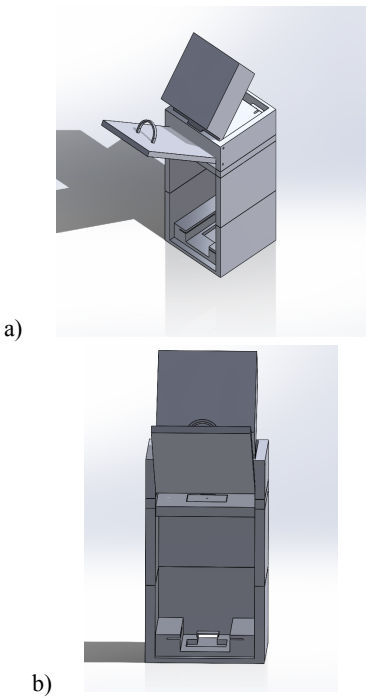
High-Powered LED - Pinhole Chassis Design ; a) Isometric View ; b) Front View
